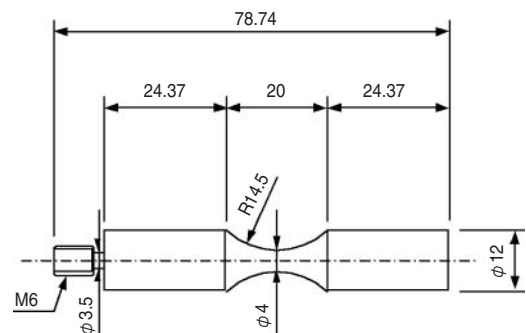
Geometry and dimensions of ultrasonic fatigue test specimen
